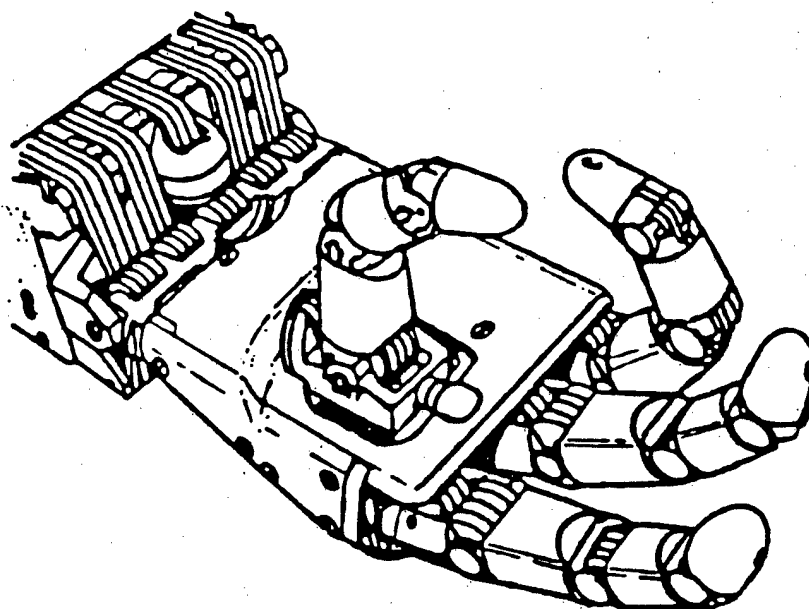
Line drawing of the Utah/M.I.T. Dexterous Robot Hand [4]
